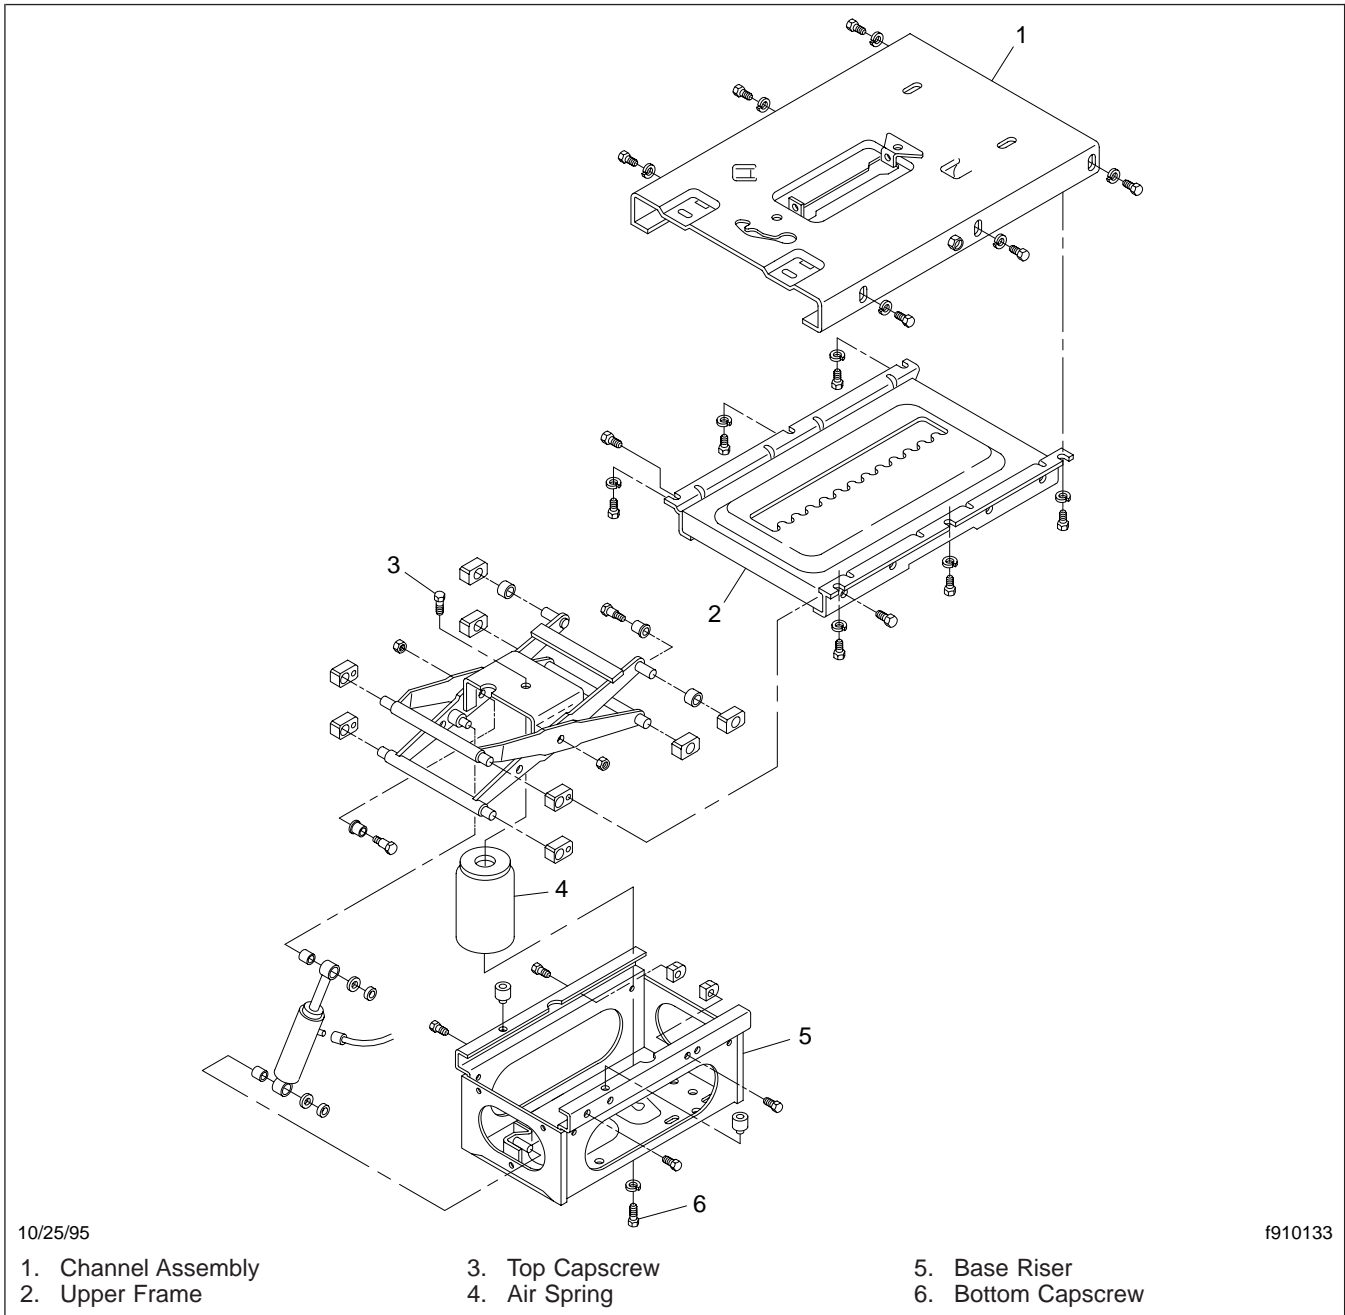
, Bostrom Talladega 900 Series Seat Air Spring
